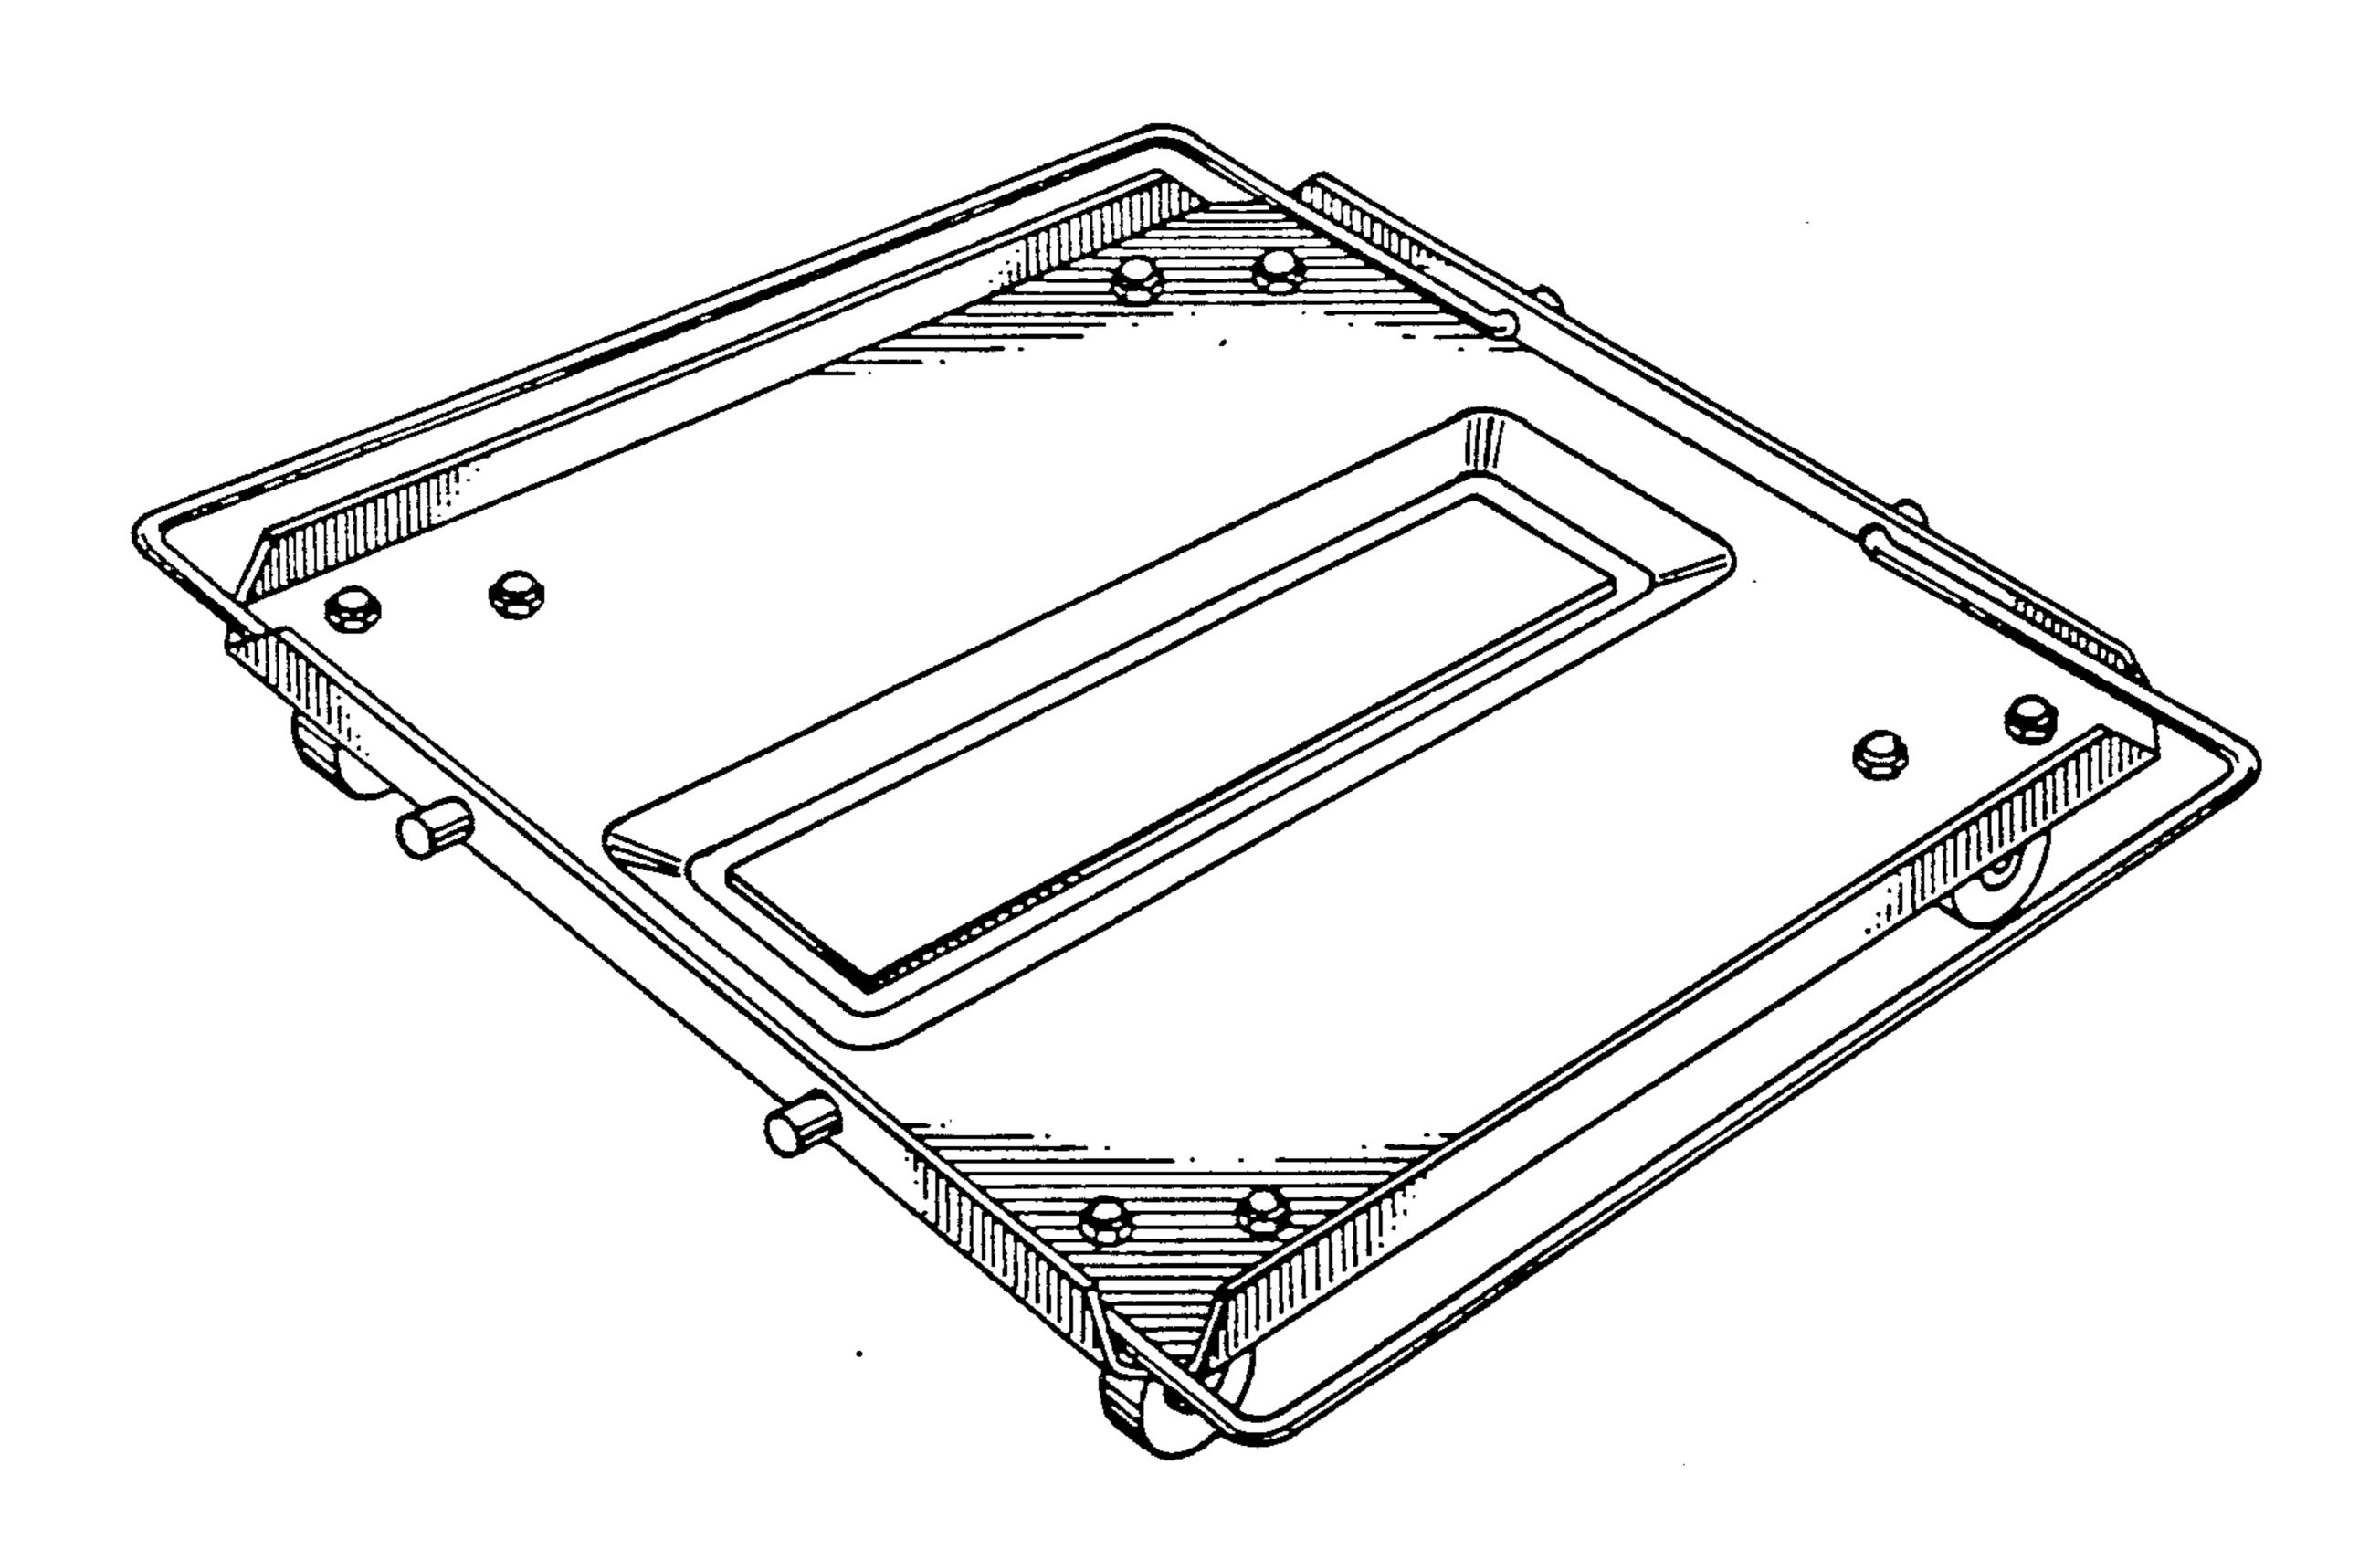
is a top perspective view of a second embodiment of the wheeled tray with handles;
